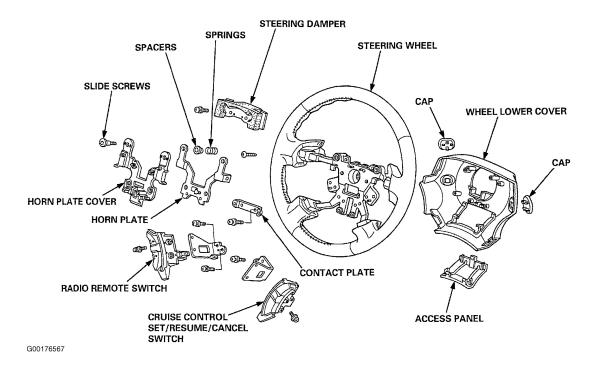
Exploded View Of Steering Wheel Disassembly/Reassembly (3.5RL)
